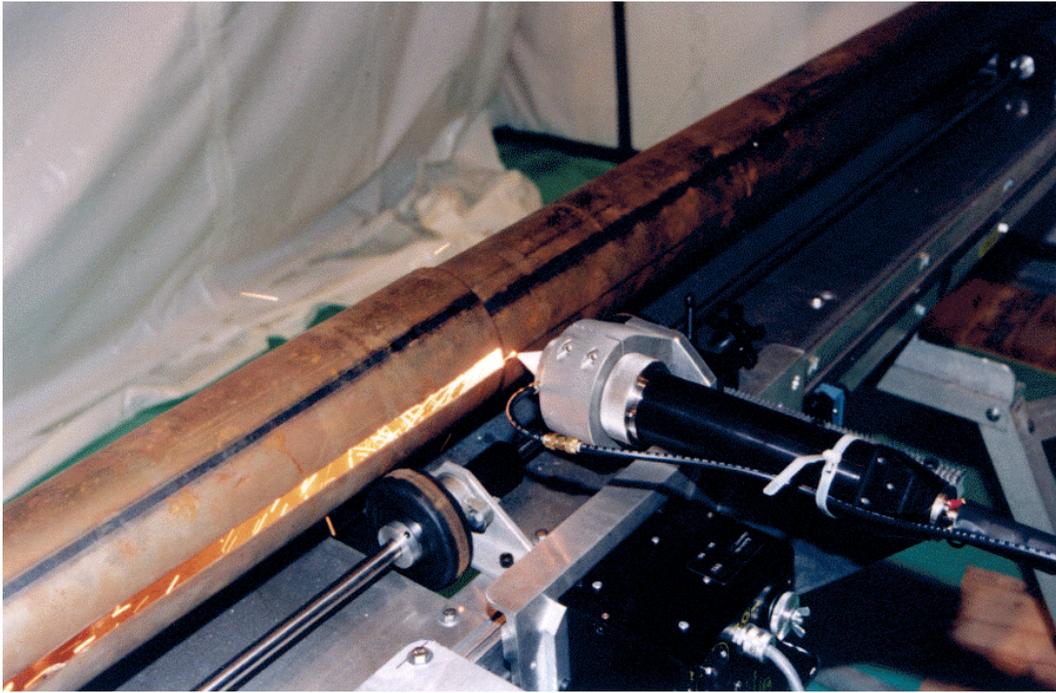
Laser Cutting of a Fuel Storage Tube
